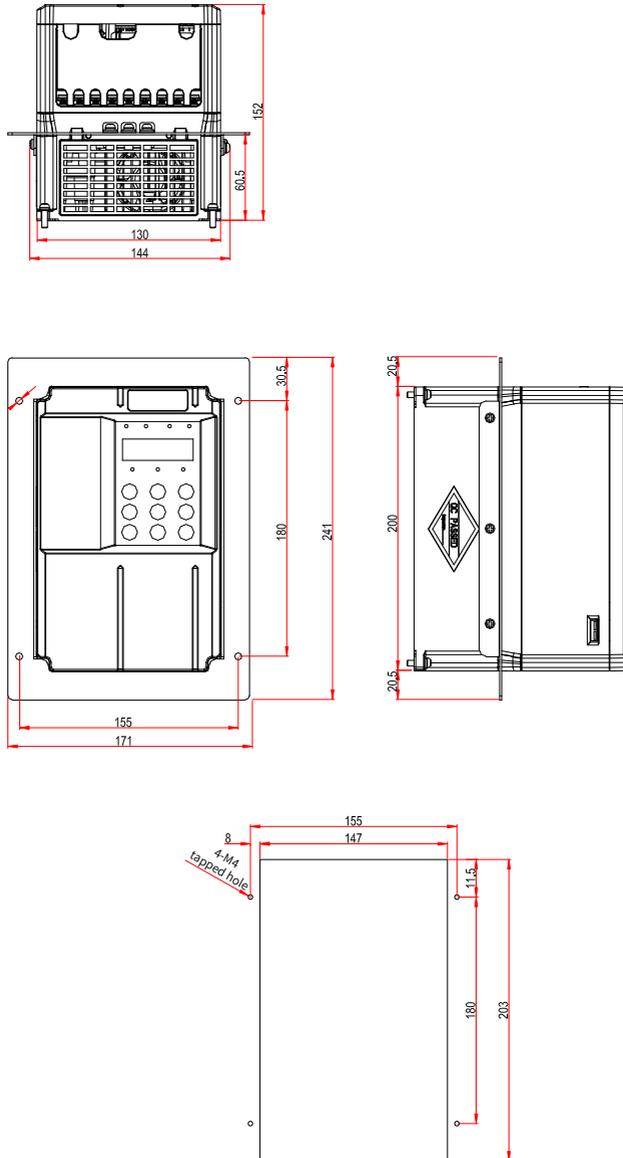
Intermediate mounting bracket dimensions and hole spacing for 0.4-3.0 kW AC drive models
